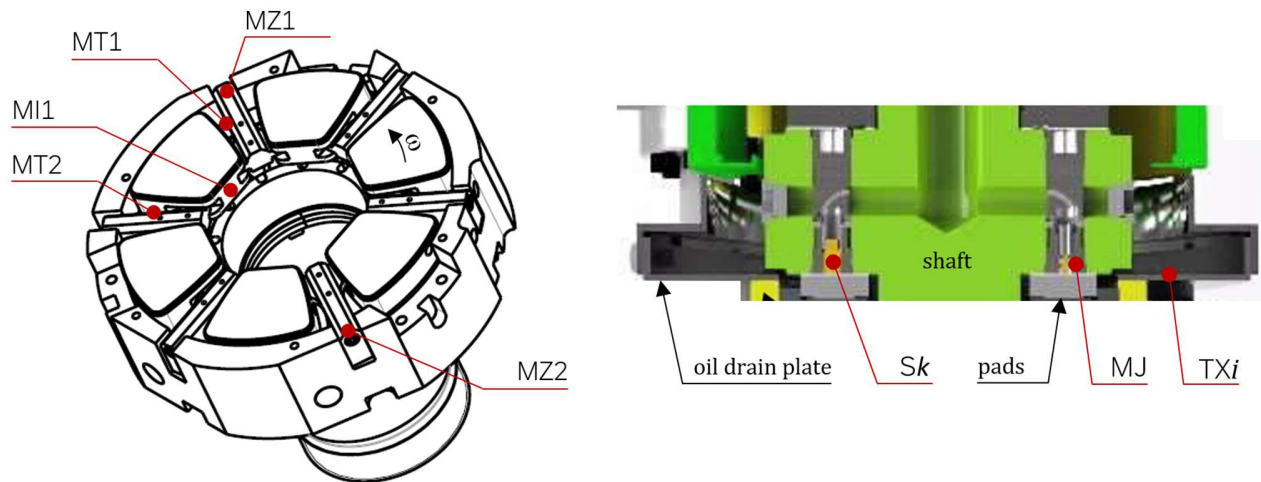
Measurement probes of the bearing (*left*) and shaft or housing (*right*)
